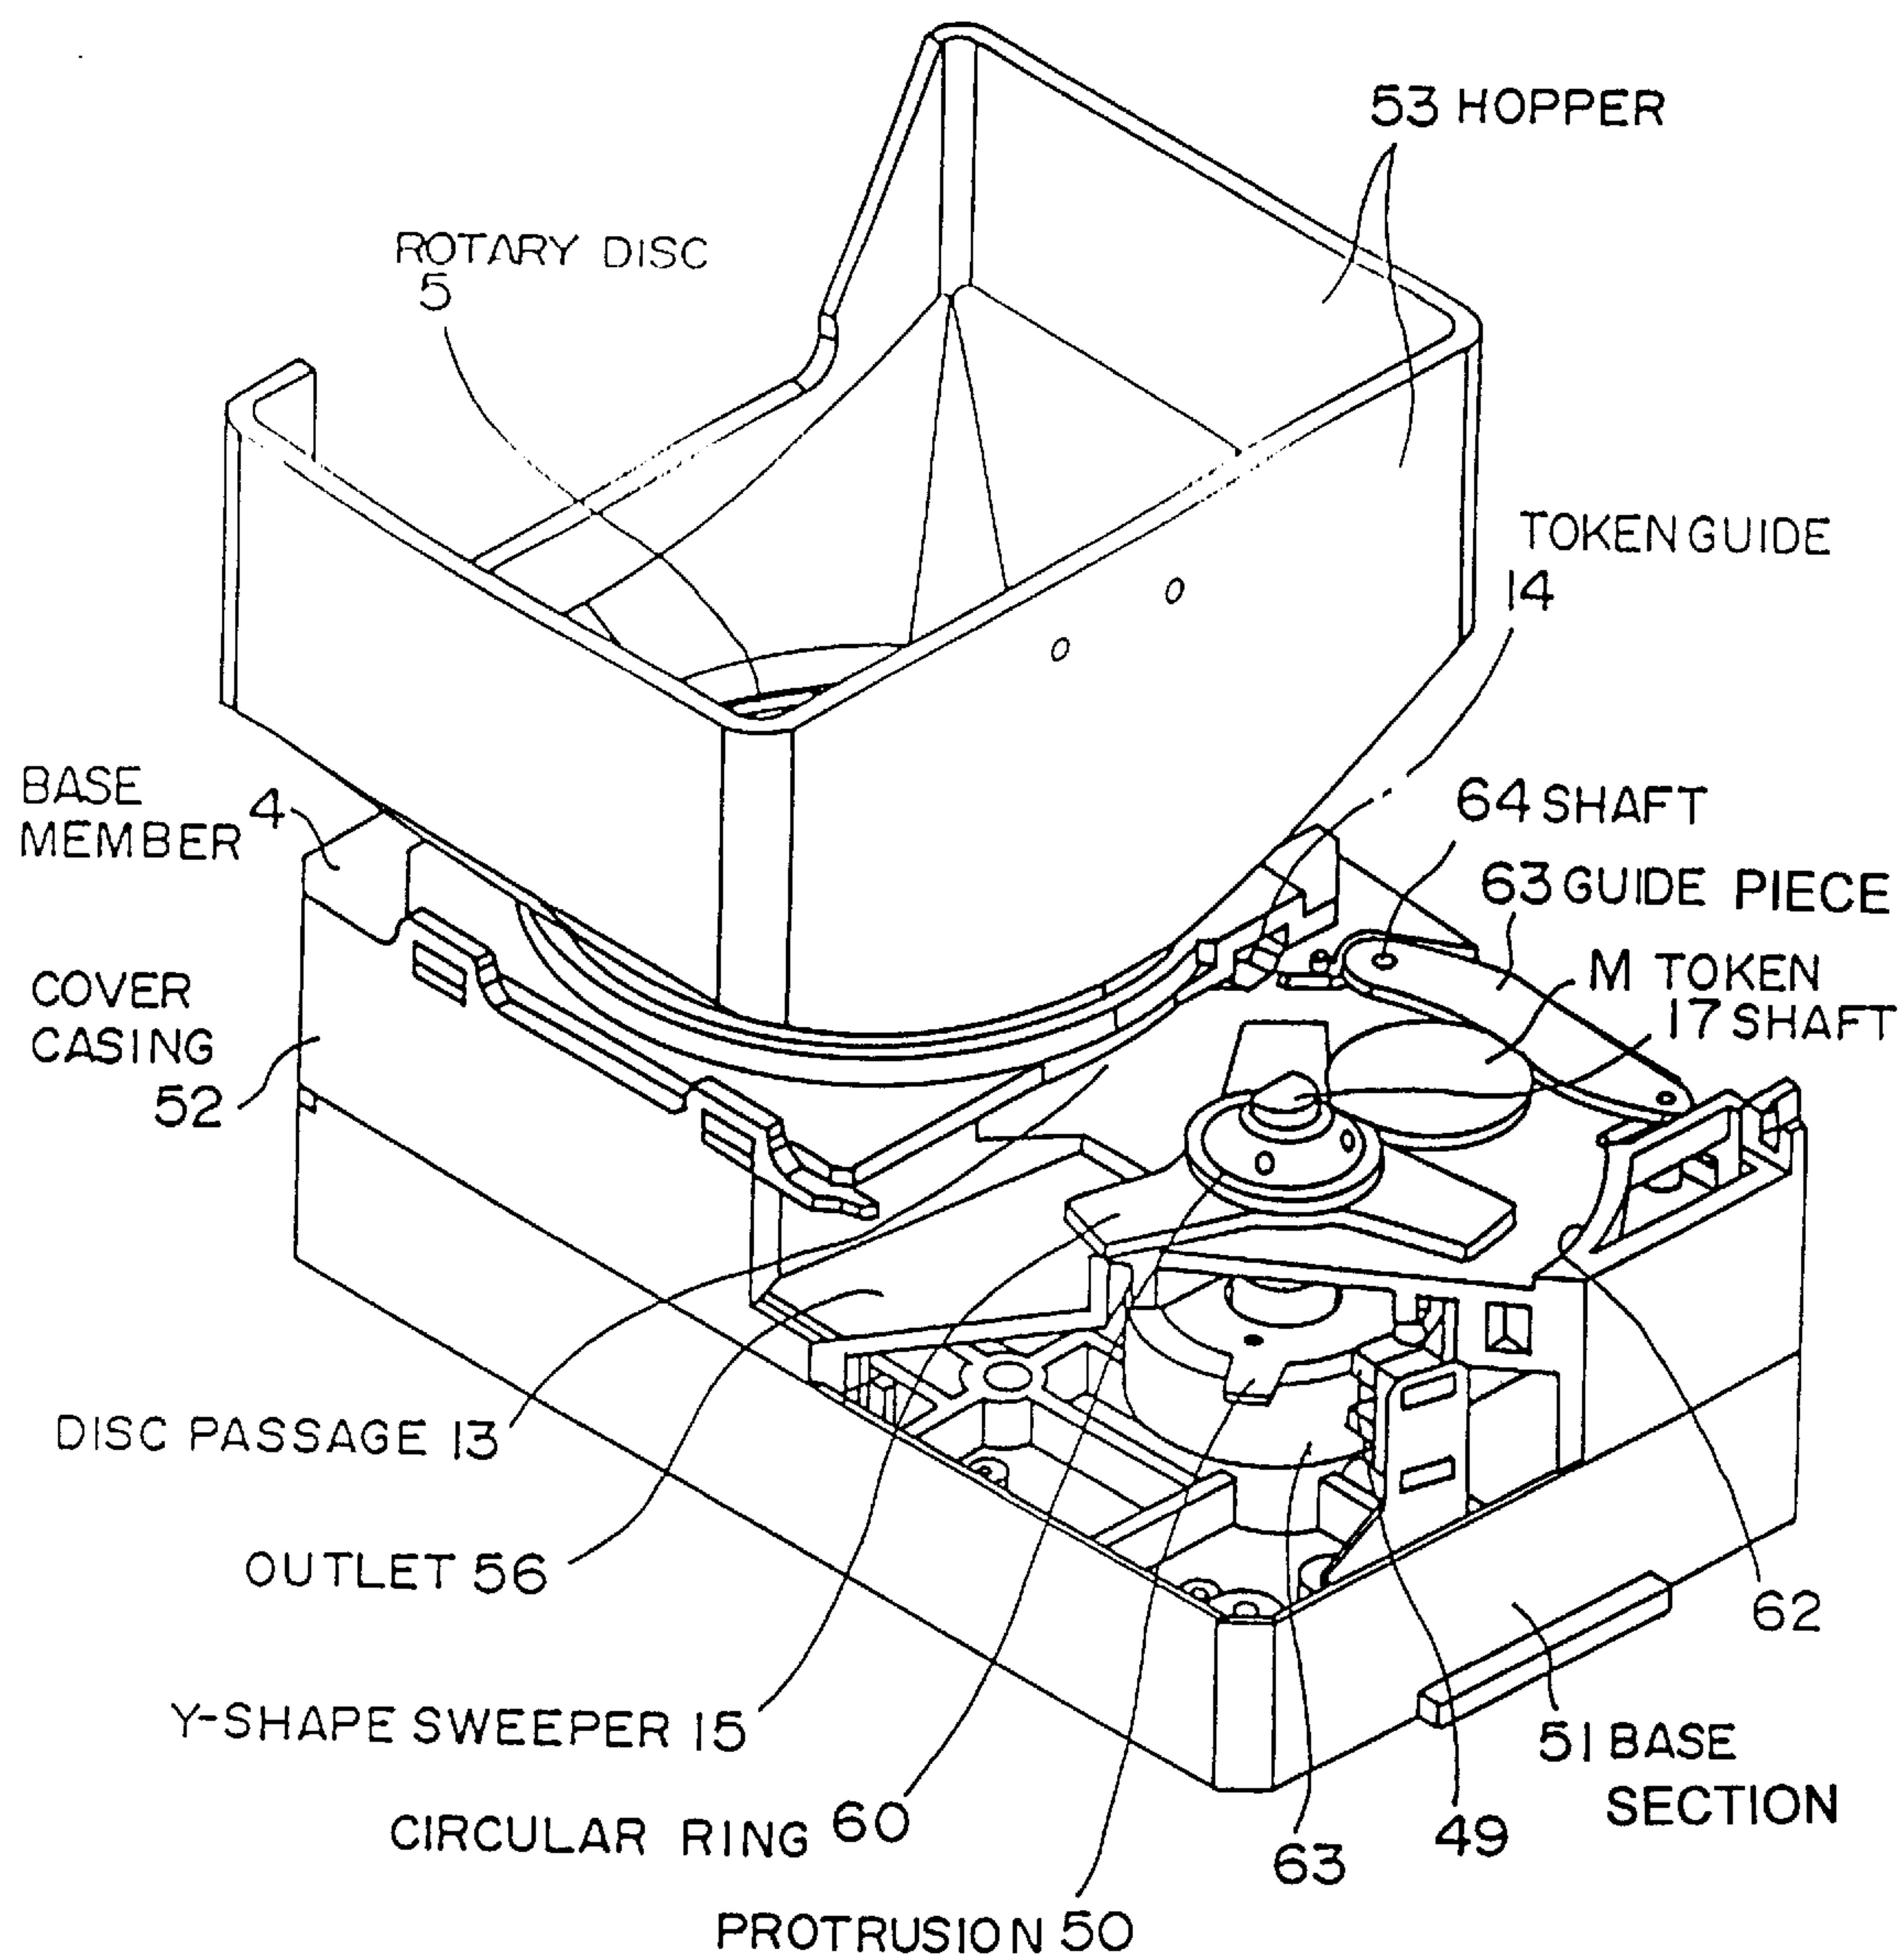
HEAD IS MOUNTED ON THE COVER SECTION
